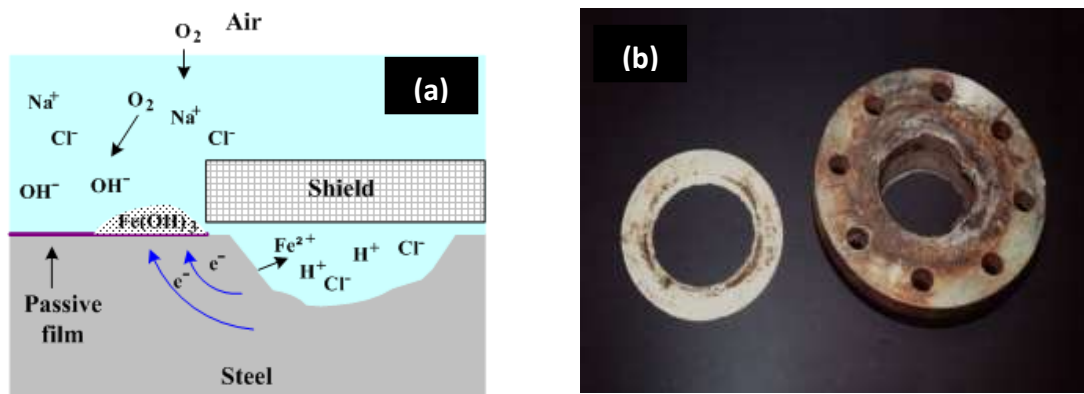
Crevice corrosion. a) Mechanism [54]; b) Flange crevice corrosion [55]
